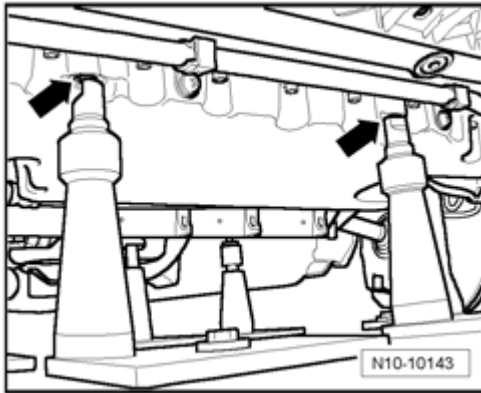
Guiding Front Engine Mounts Into Holes Of Oil Pan
